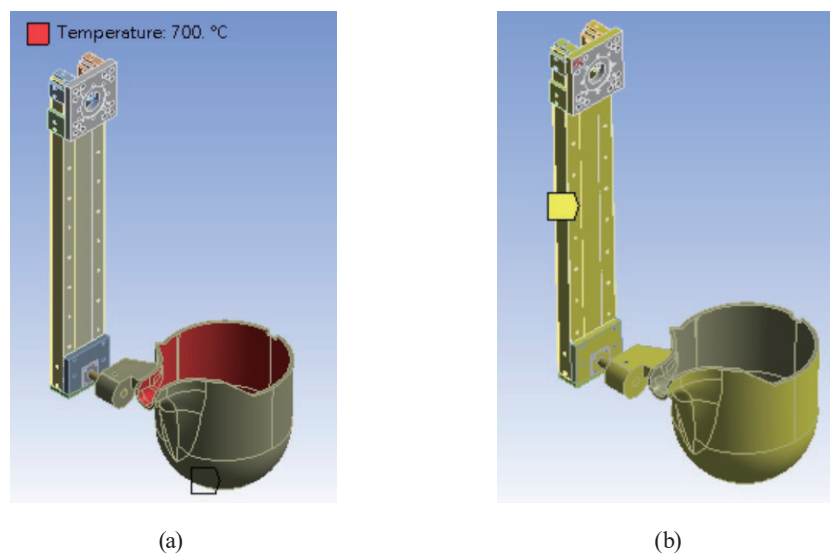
(Color online) Diagrams for (a) temperature and (b) convection setting surfaces of the investigated molten aluminum alloy casting mechanism.
